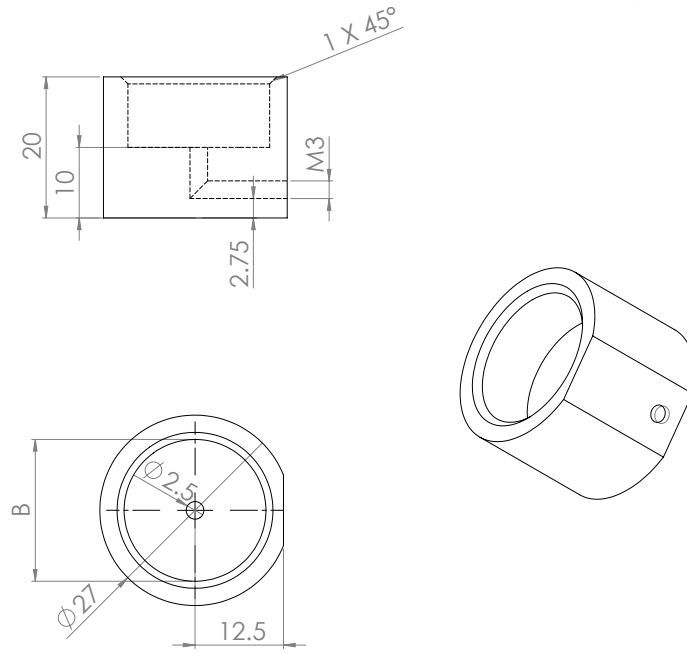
Drawing of the End Cap with all its dimensions in mm. The internal diameter "B" is a parametric dimension that will change according to the production method and material.
